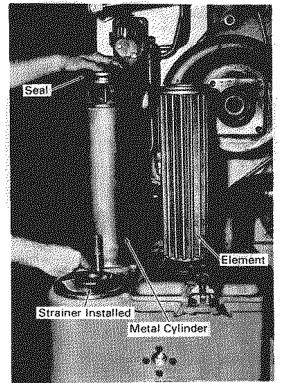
Main And Piston Cooling Oil Pump Strainers
